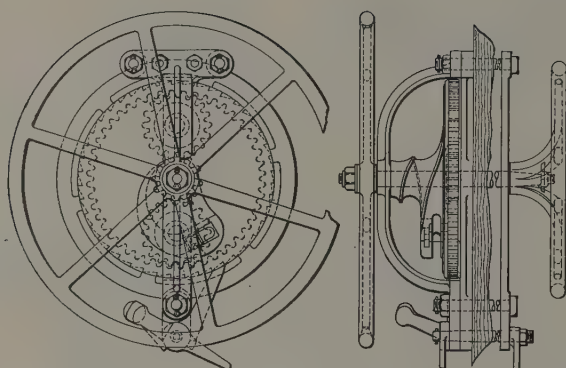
Peacock Brake for Blind End Cars. National Brake Company, Inc.
